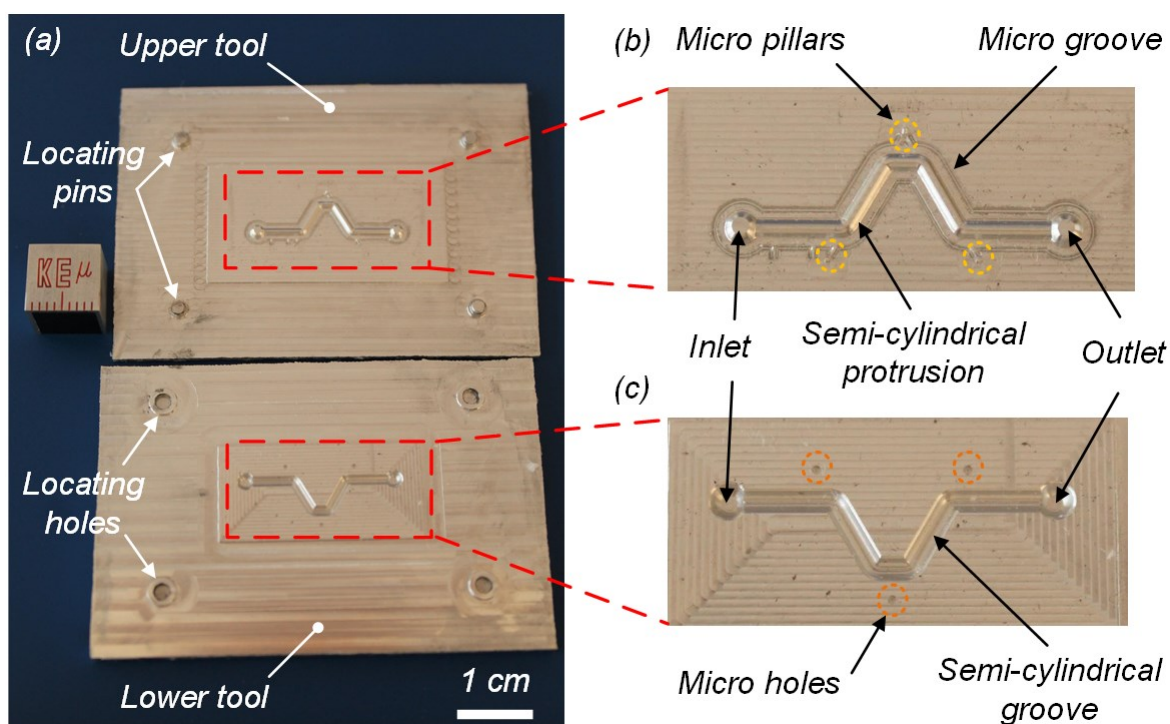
Tools (a) for ultrasonic thermoforming, and milled structures on upper tool (b) and lower tool (c).
